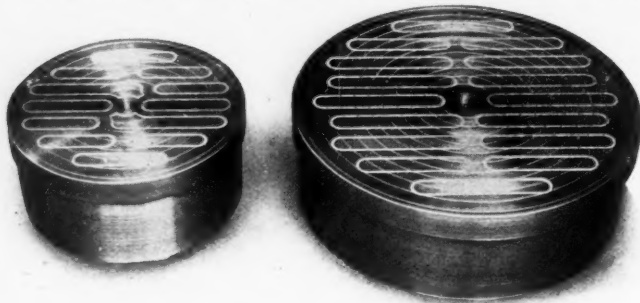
8- and 12-inch Sizes of Heald Rotary Magnetic Chuck
